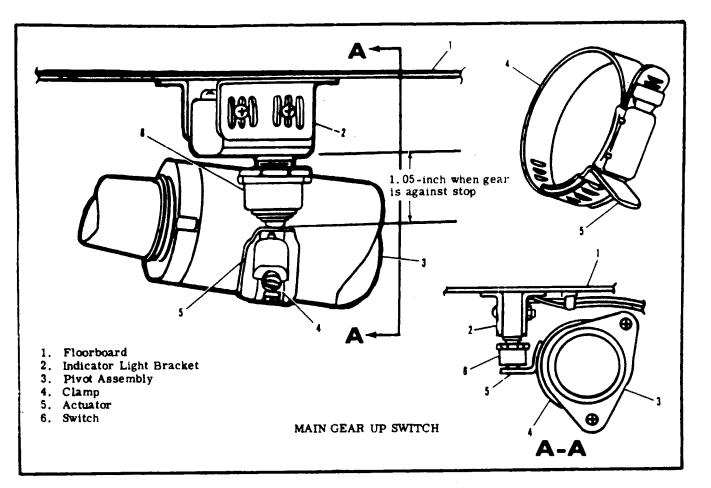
A-10. Rigging Main Landing Gear (Sheet 3 of 3)
